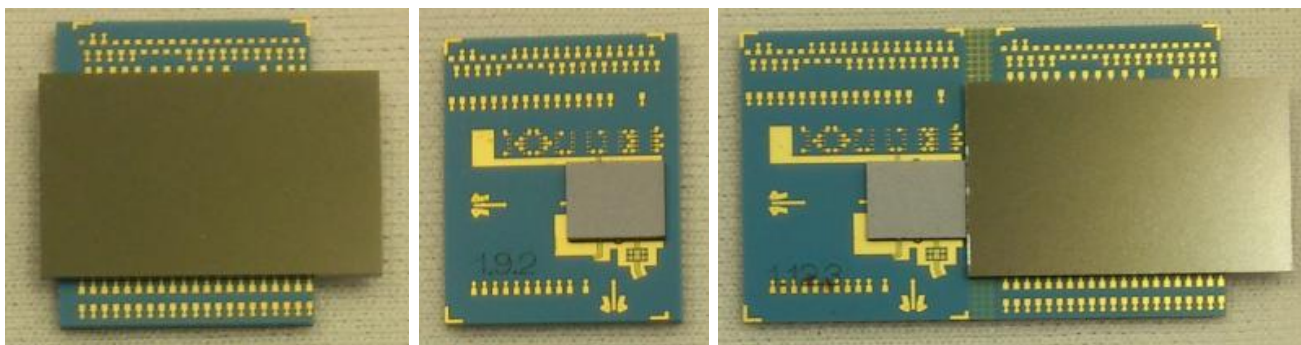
Photographs of first TriPleX (left) and InP (middle) test chips assembled on LTCC carriers, assembly of two chips on same carrier (right).
